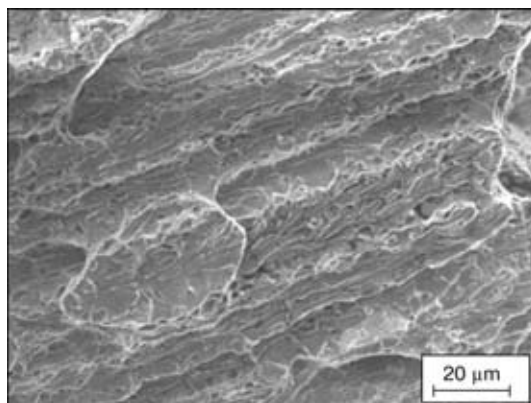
General view of fracture surface of sample containing TIG weld after impact strength test. Before the sample test the low-temperature holding (700 °C, 100 h) was used
